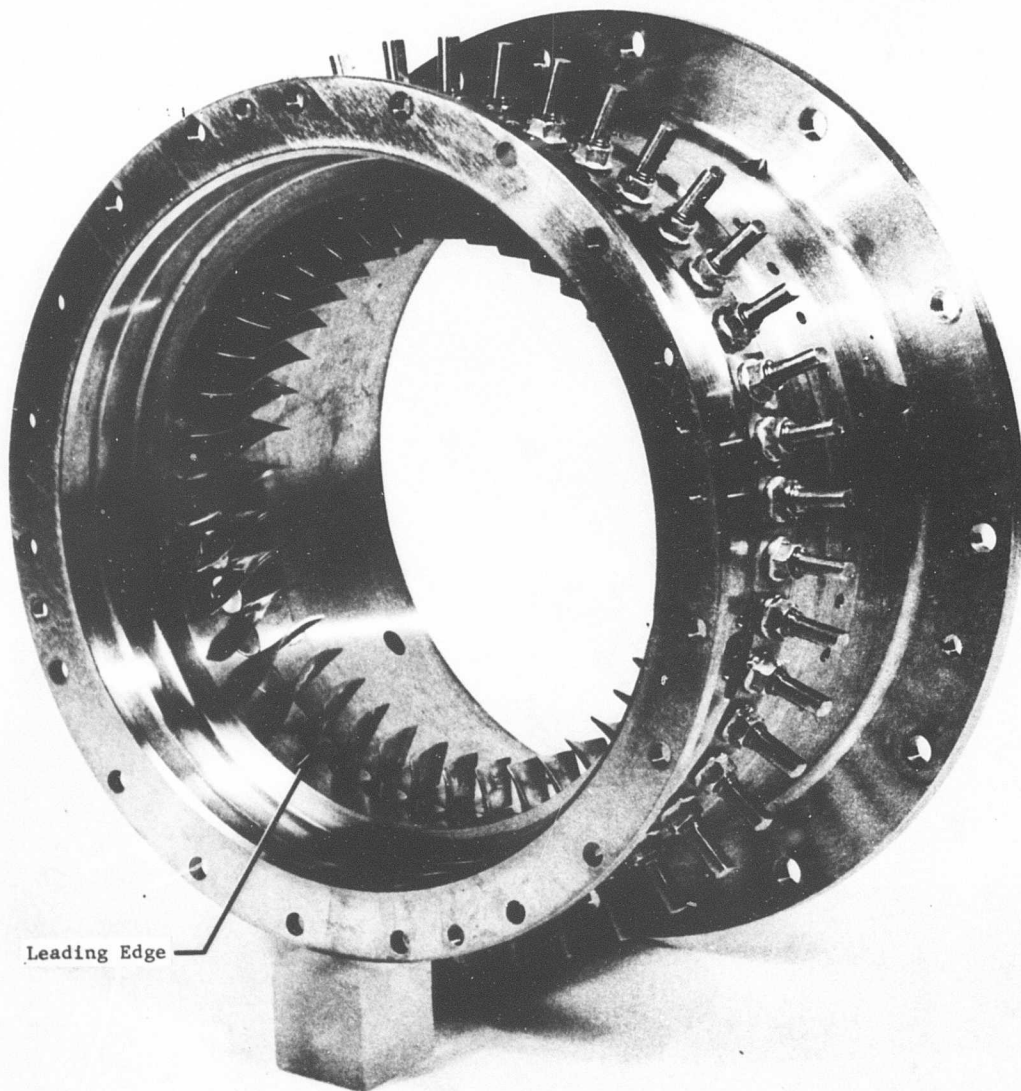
Redesigned Exit Stator and Outer Housing Assembly, Front View.
